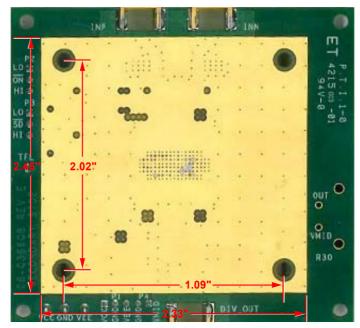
Dimensions of the Heat Sink and Mounting Holes
